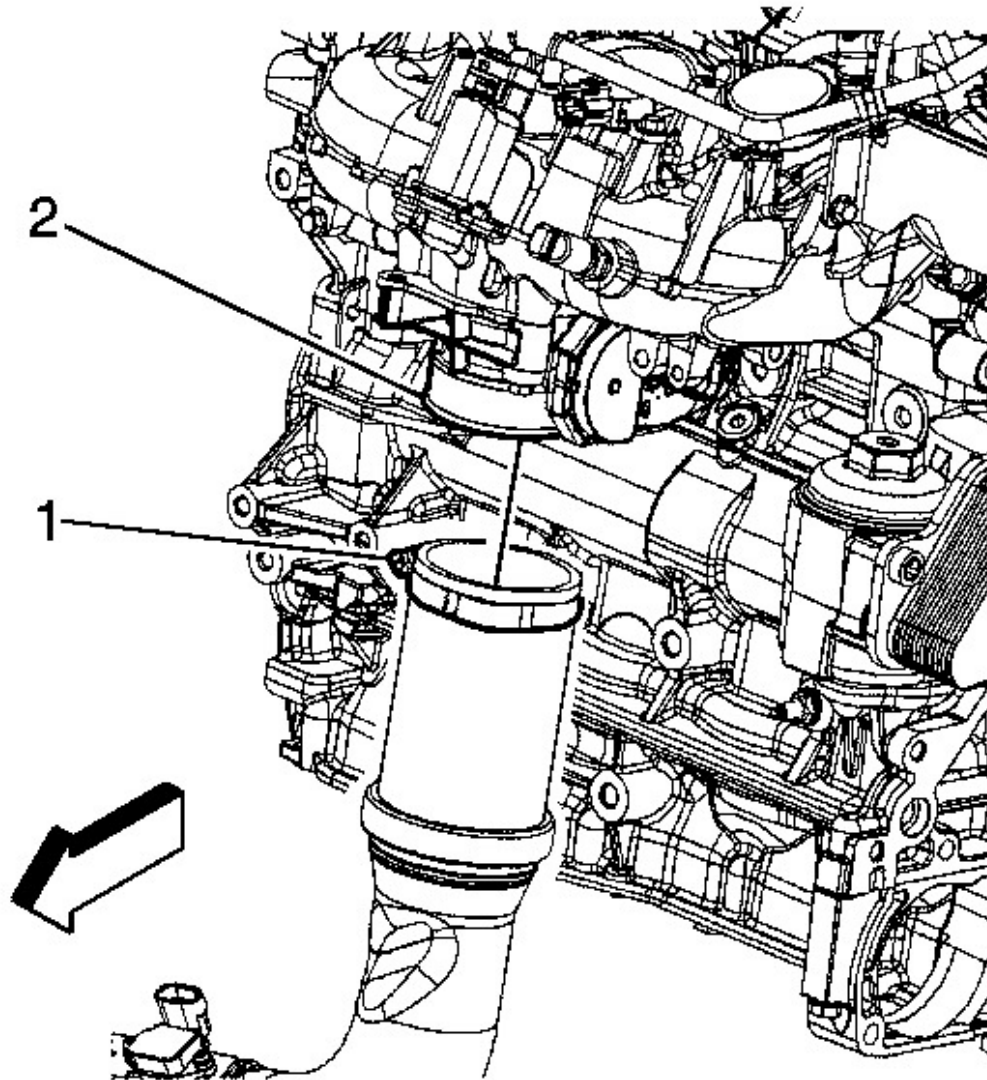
View Of Charge Air Cooler Outlet Pipe
